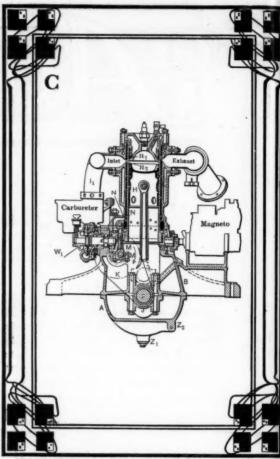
Fig. C-Transverse section of the Panhard-Knight motor, showing the small connecting rods that operate the sleeves and the cup-shaped piston
